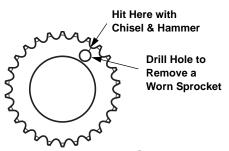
CRANKSHAFT CHAIN SPROCKET - TYPICAL through the sprocket and into the crankshaft face.
